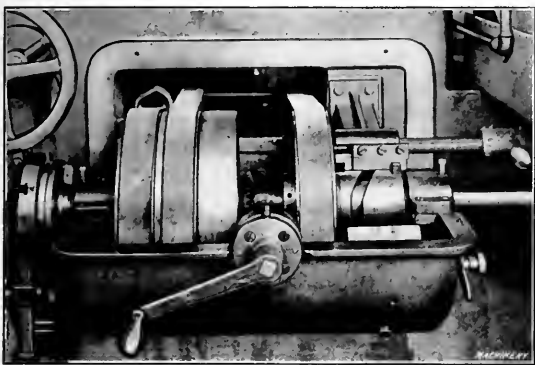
Belt-shifting Mechanism of Diamond Grinding Machine
